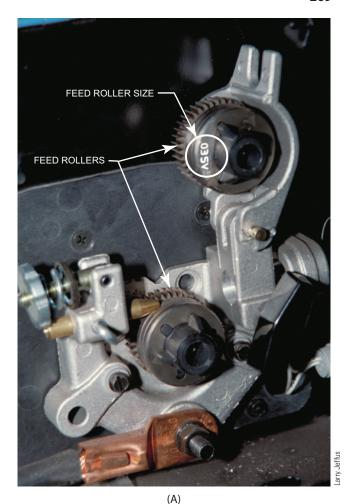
When installing the spool of wire, check the label to be sure that the wire is the correct type and size.
